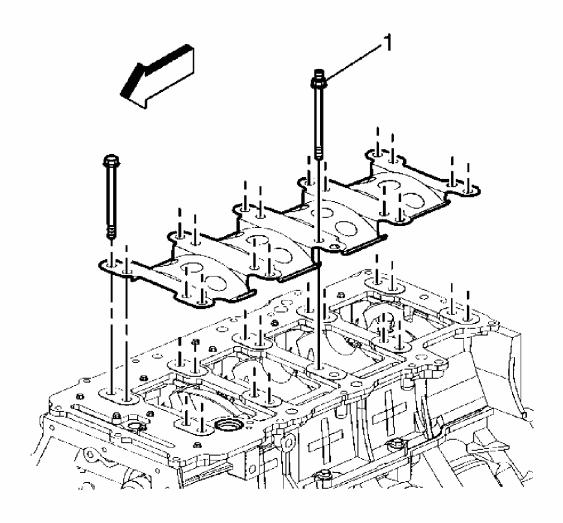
Identifying Stud-End Bolt Courtesy of GENERAL MOTORS CORP.
